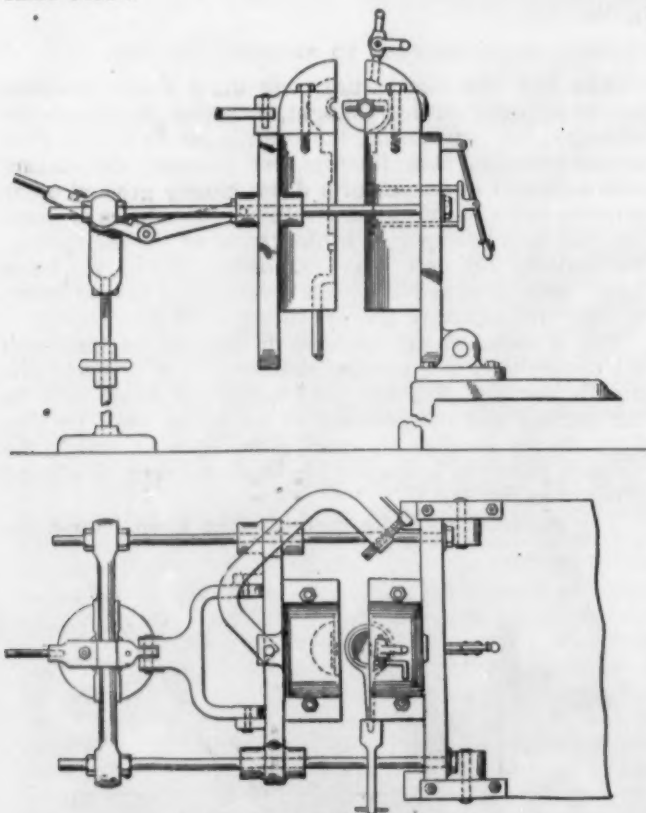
DOEHLER COMPRESSED-AIR MACHINE.
